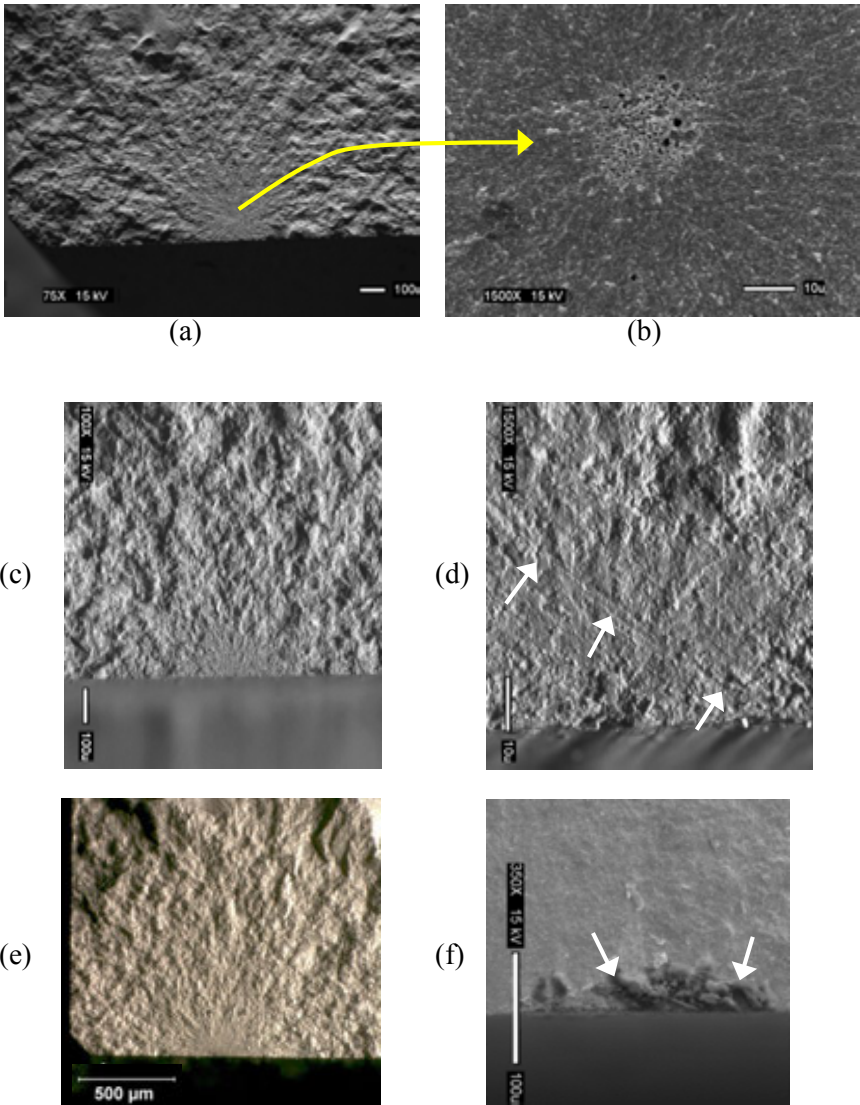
Contaminants in 3Y-TZP bend bars. (a) and (b) show a clean fracture with a well-defined fracture mirror and the common flaw in this material: a pore or porous region origin. (c) and (d) show clay smeared over the fracture surface and fracture mirror in another specimen. Notice the parallel smear traces (arrows) from lower left to upper right in (d). The clay is not evident in the low magnification image of the mirror, but it covers the origin in (d). It is possible the wrong end of the bend bar initially was put into mounting clay! (e) and (f) show a mirror with an unknown contaminant covering the origin (arrows). (all courtesy of J. Quinn)
